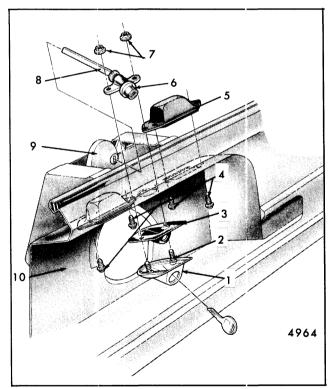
Rear Compartment Lid Lock Cylinder - Chevrolet "F" Styles
